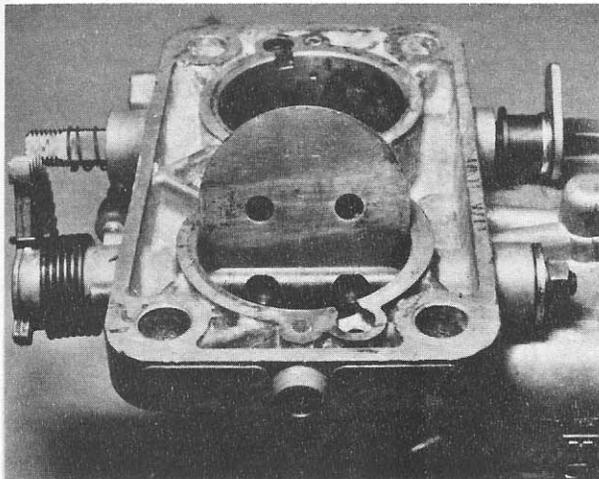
Tool for removing the auxiliary venturis (Sec 6)
